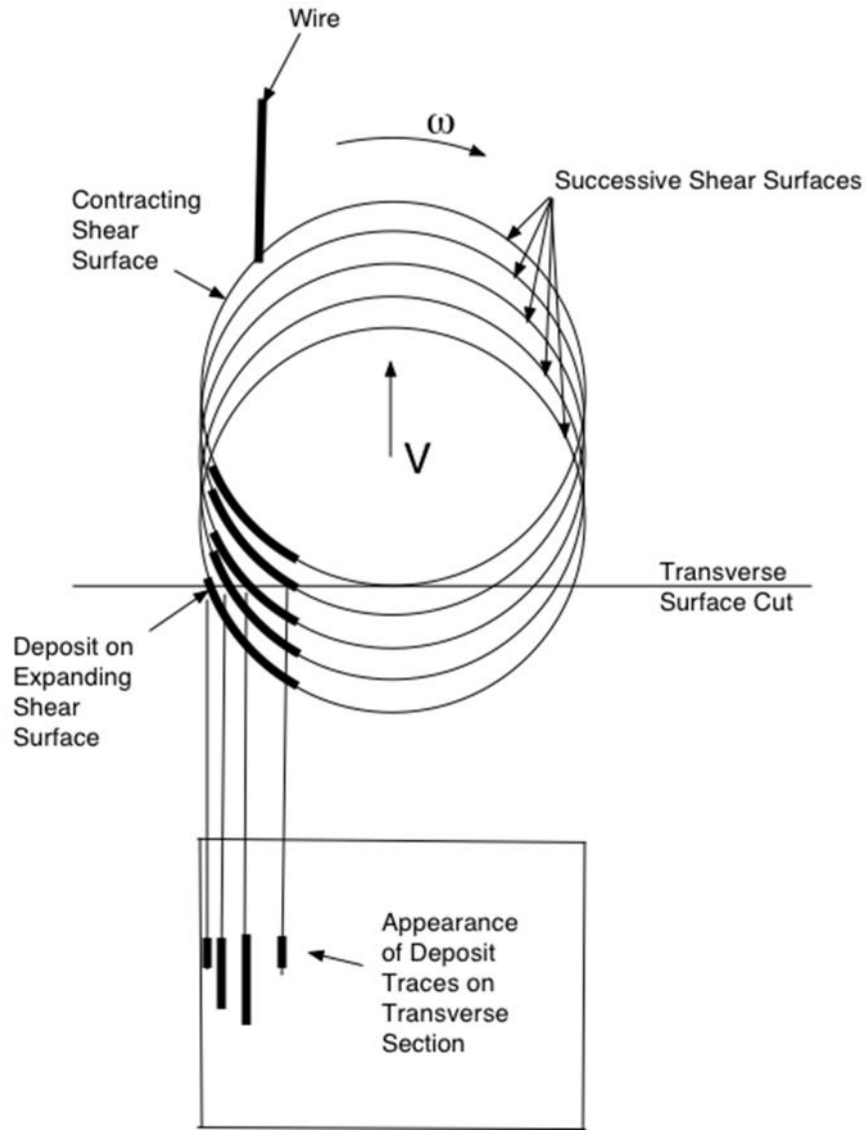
Schema for the generation of lead wire traces in plan and transverse sections.
